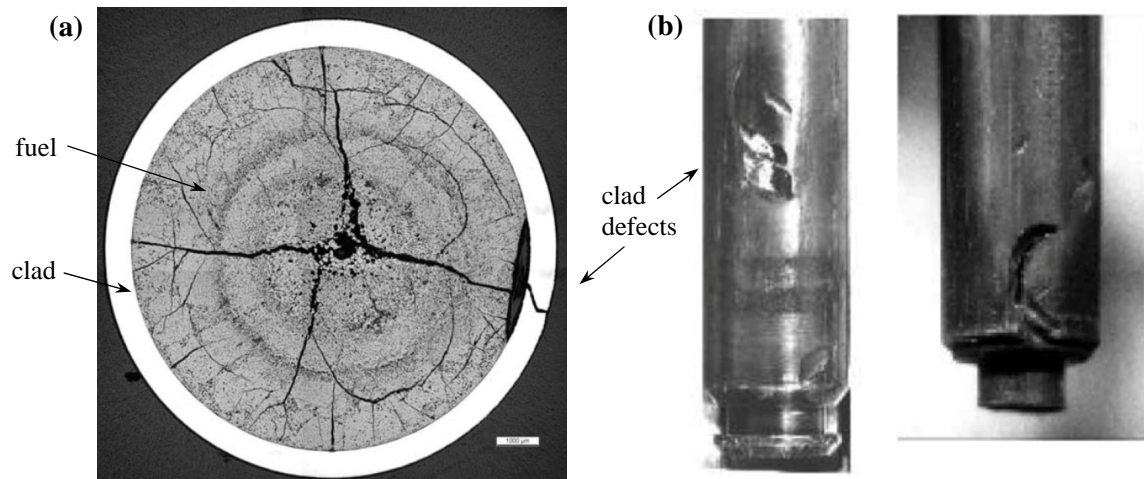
(a) An example of SCC clad defect in BWR fuel and (b) an example of debris fretting in BWR fuel rods bottom section. Images taken from [31] and [32], respectively.
